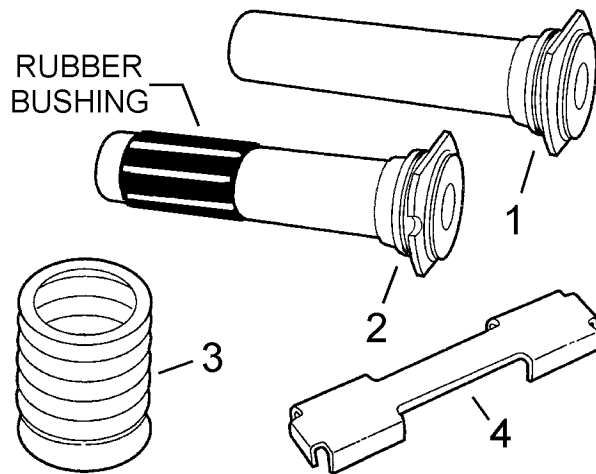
Clean and Inspect Guide Pin Boots and Abutment Slippers
